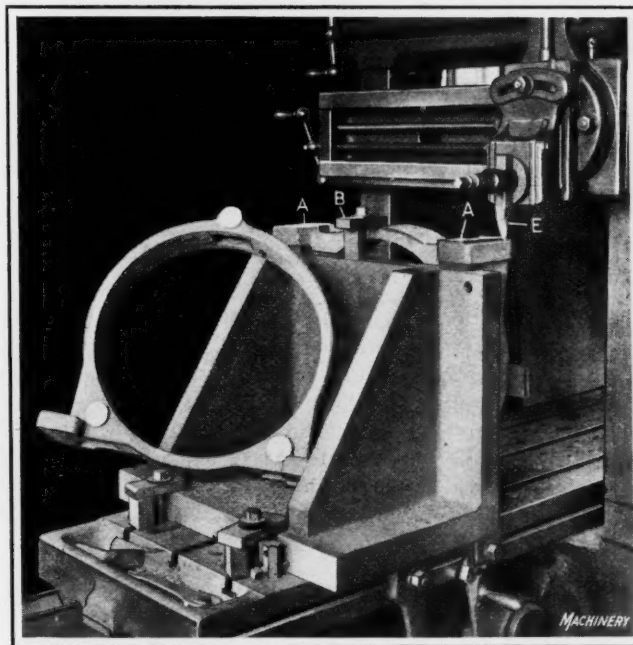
Planing Base Pads on Stock Reel Support for an Automatic Screw Machine
